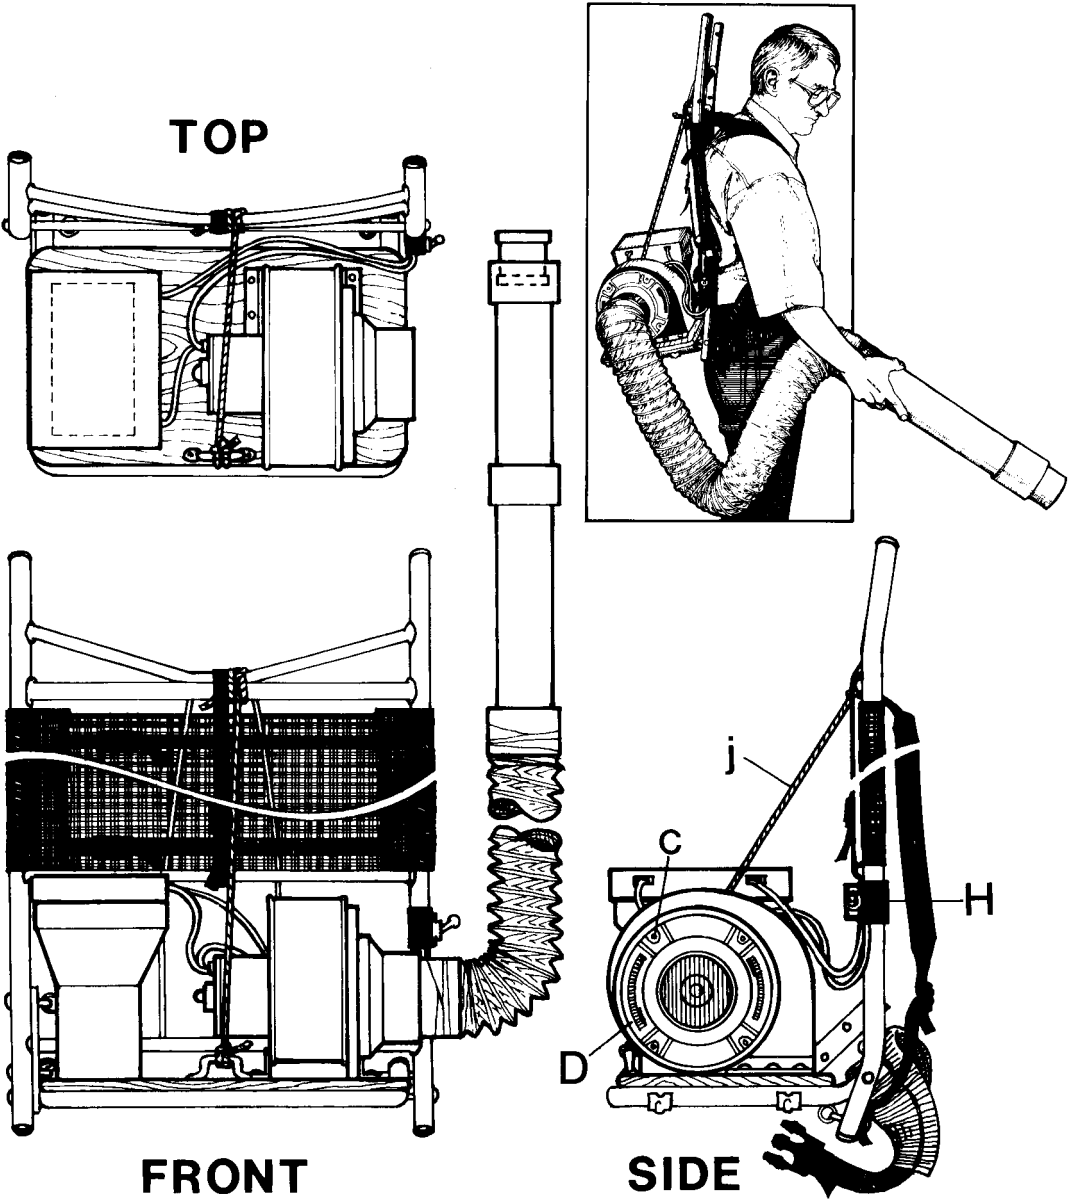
Three views of the "CDC backpack aspirator" showing the various components. Refer to Appendix 1 for a complete list of components and Appendix 2 for step-by-step assembly instructions.
